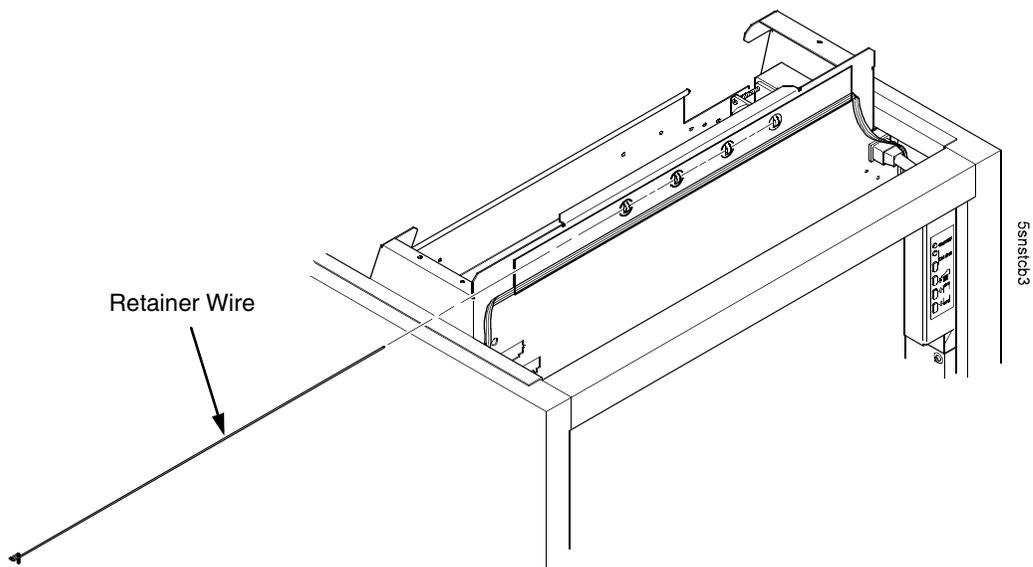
Installing the Cable Routing Guide Retainer in a CFX (P5220) Printer
